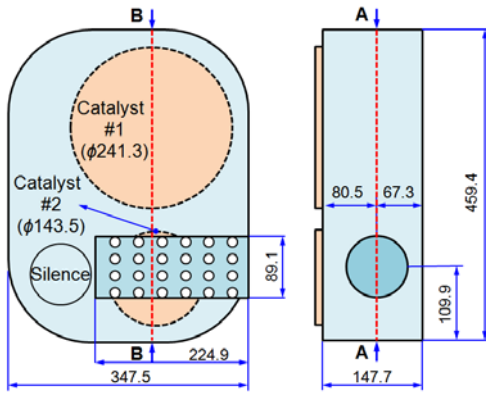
Detail sketch of plenum chamber and multi-perforated tube
